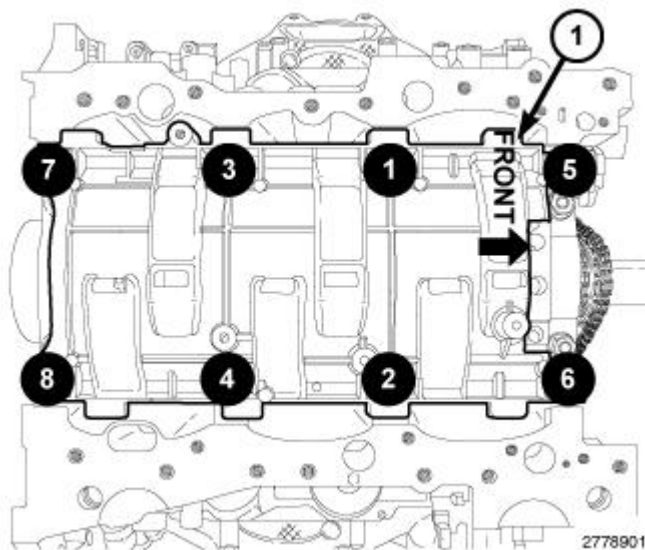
Windage Tray With Main Bearing Cap Bolts Installation Sequence
